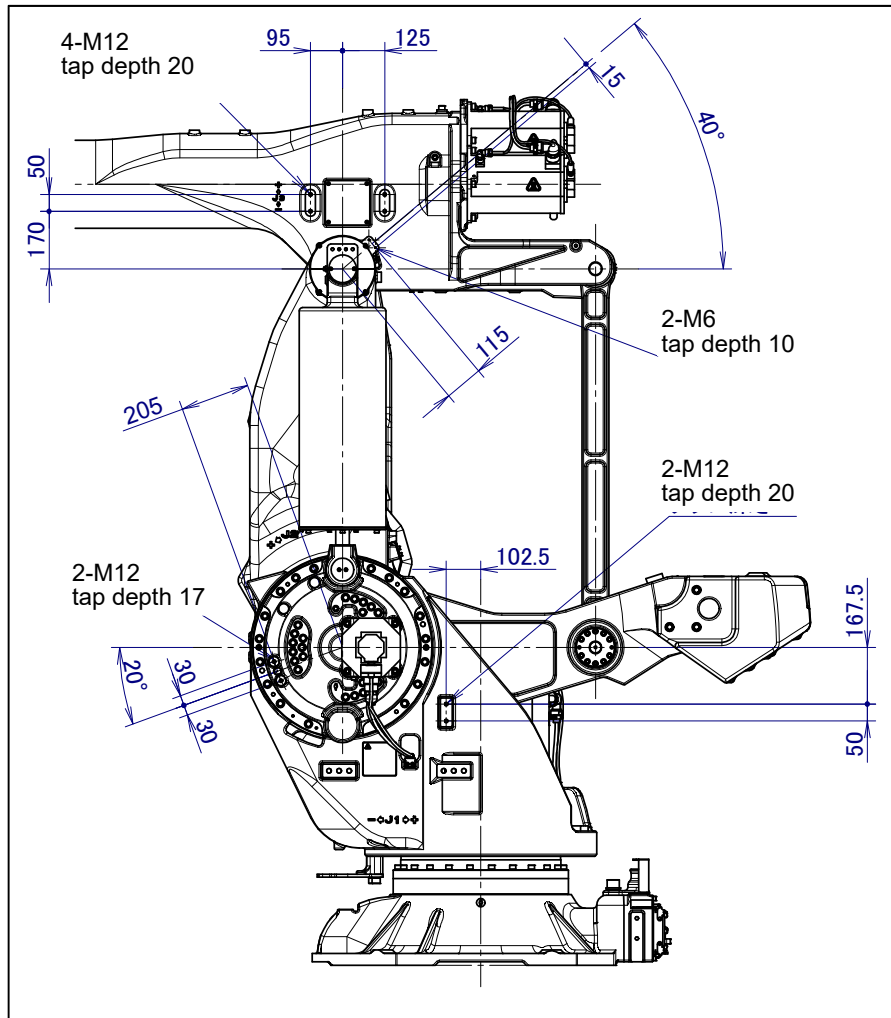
(d) Equipment mounting faces (M-900iB/400L) (2/2)
